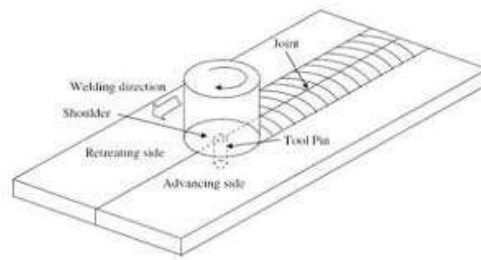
Schematic Showing the Position of Rotation Pin During Friction Stir Welding
